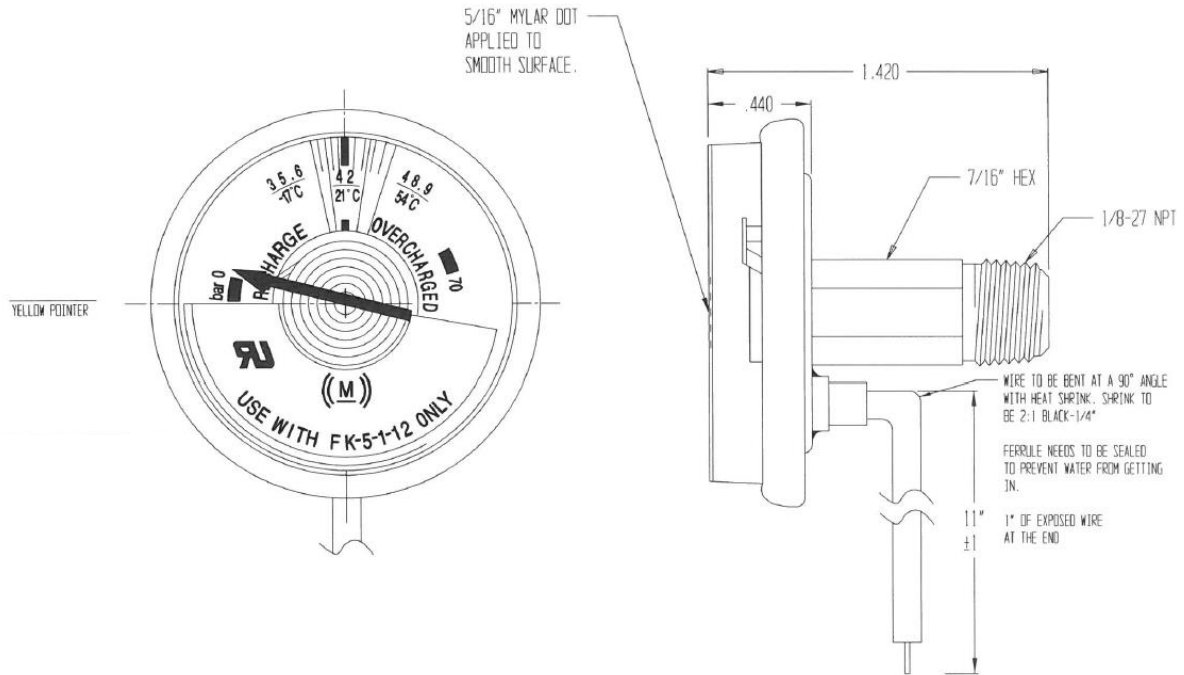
42 bar Pressure Gauge with Low Pressure Switch
